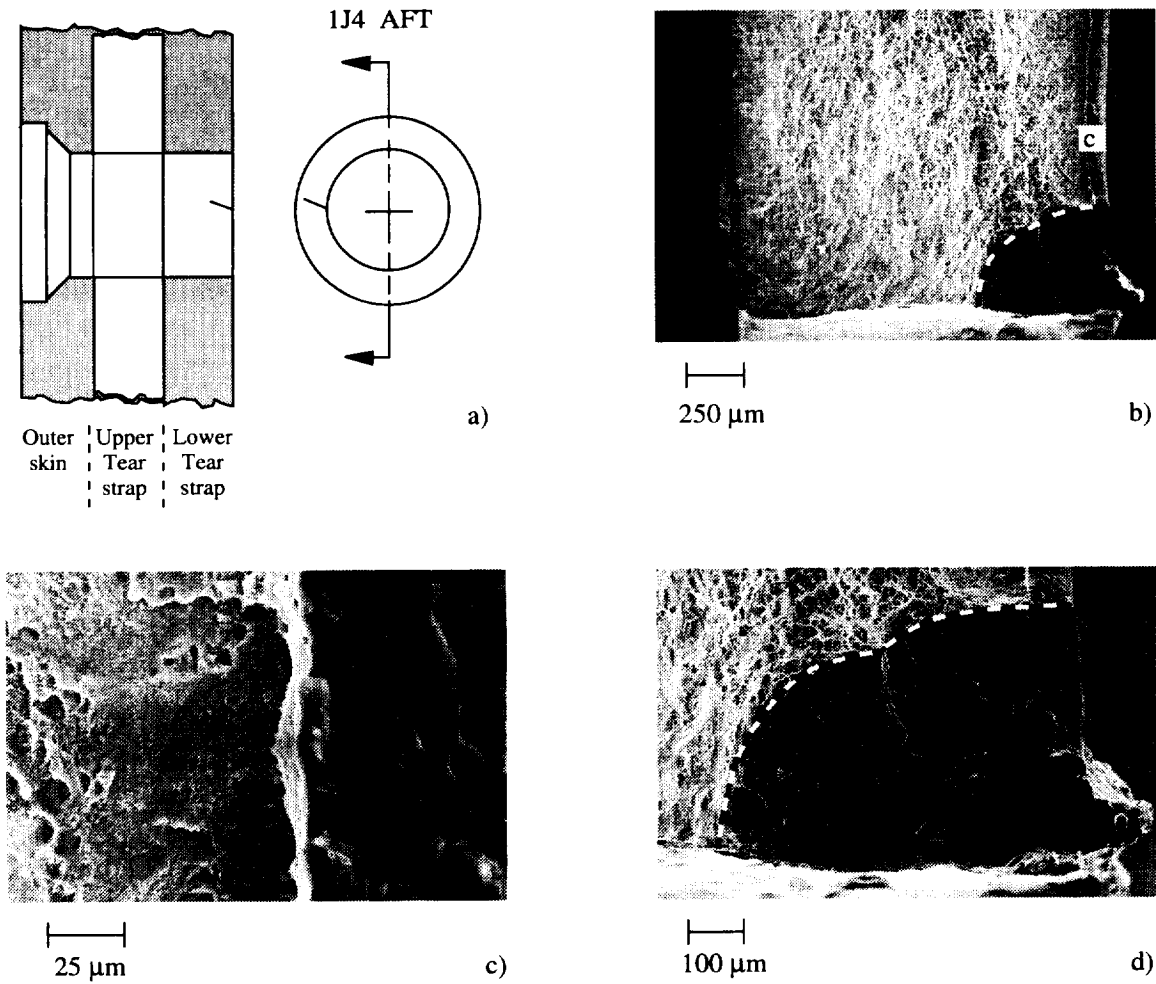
a) The schematic shows the rivet hole 1J4 configuration and the location of the lower tear strap fatigue crack oriented in the aft direction and about the 9 o'clock position. b) The SEM micrograph shows fatigue fracture surface of the rivet hole corner crack. Note the corner burr near the likely point of crack initiation (arrow). c) The SEM micrograph shows the clad/alloy interface at region "c" shown in Figure 6.21.c. d) The SEM micrograph shows the fatigue fracture surface of the rivet hole corner crack at high magnification. A dashed line marks the fatigue crack front.
